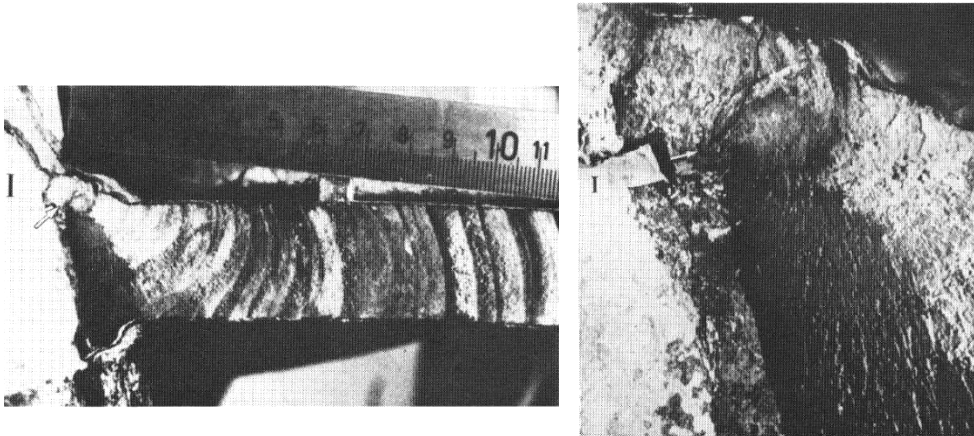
Two details of the main initiation point of the crack in the fillet weld between the bracing (horizontal plate) and the sonar flange (vertical) [1.4]
